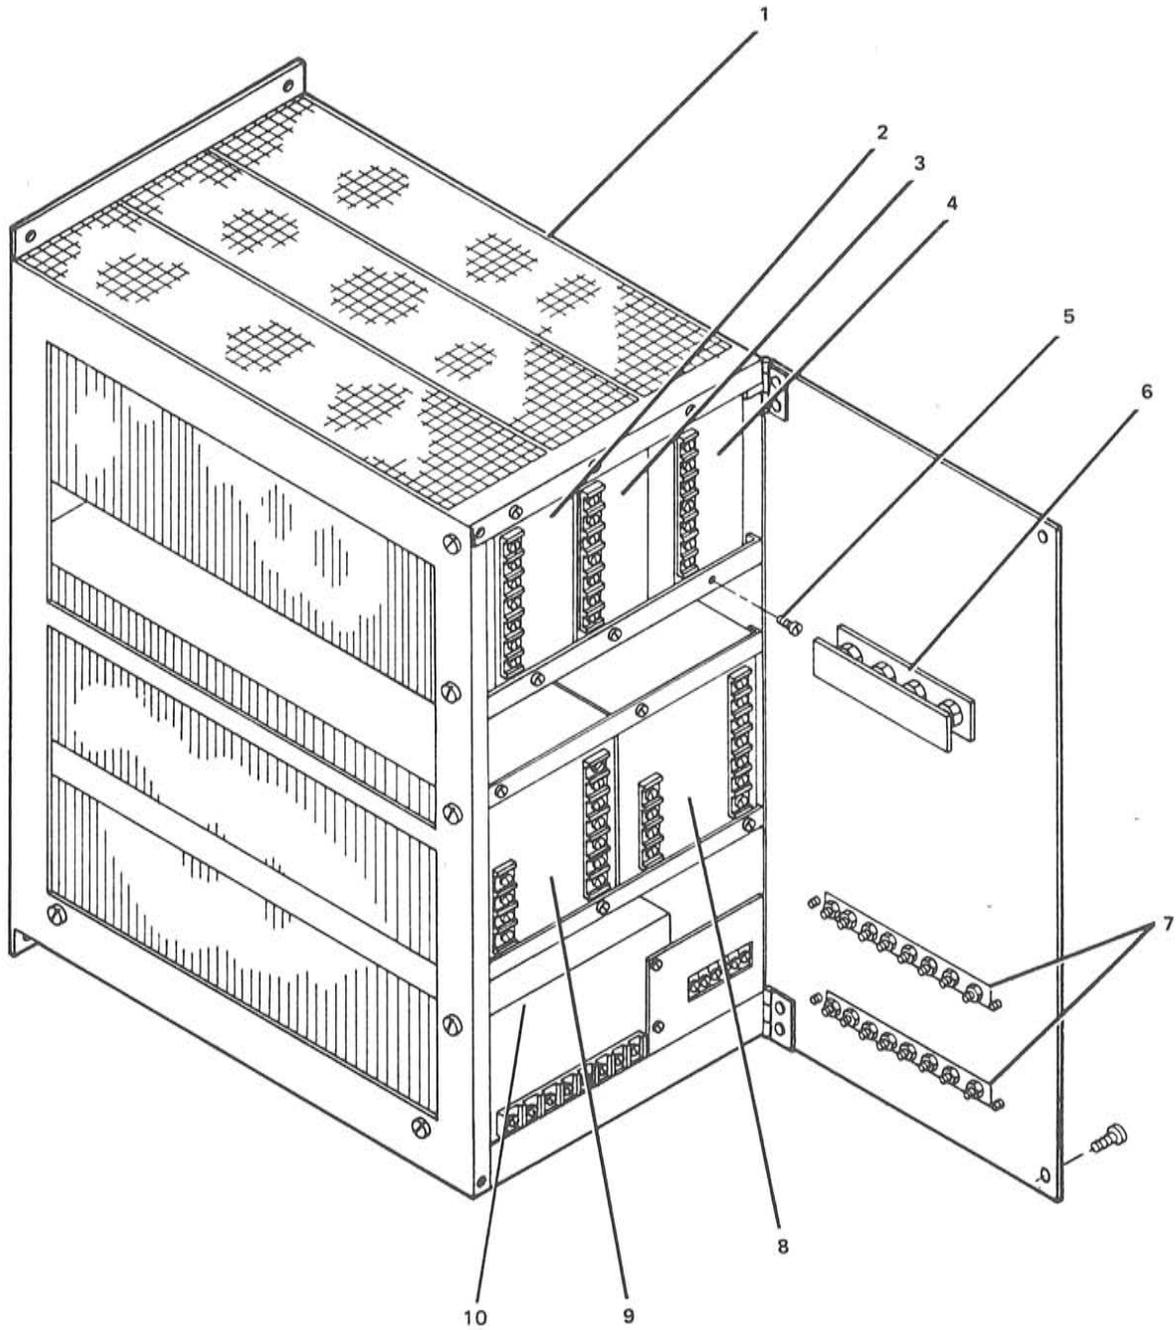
D.C. POWER SUPPLY ASSEMBLY. SEE LIST 14.
